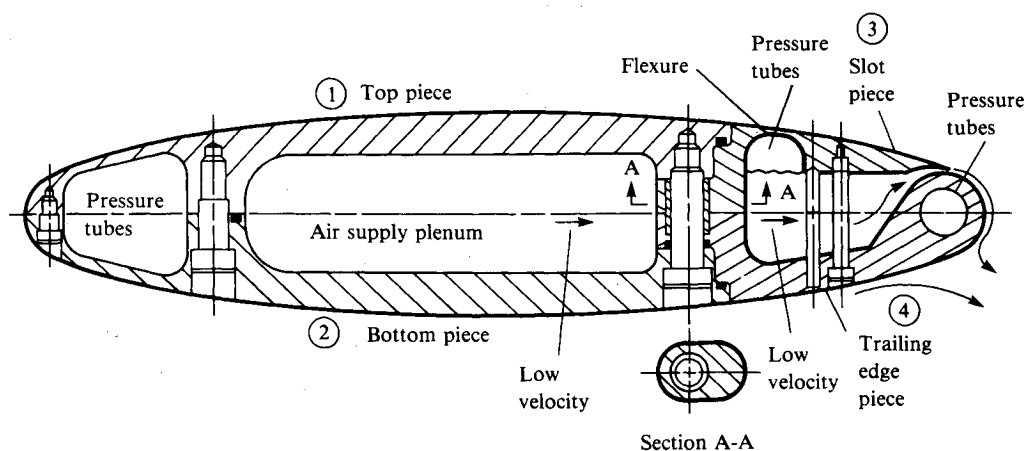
Sketch of wing section showing four-piece construction, bolts, set screw, and adjusting screw for slot height.
